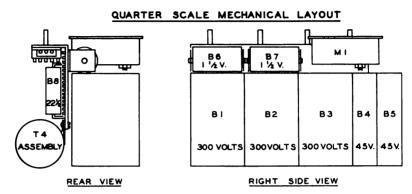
Mechanical Drawing of Unit Using Circuit of Fig. 6-21. (Left Side)
